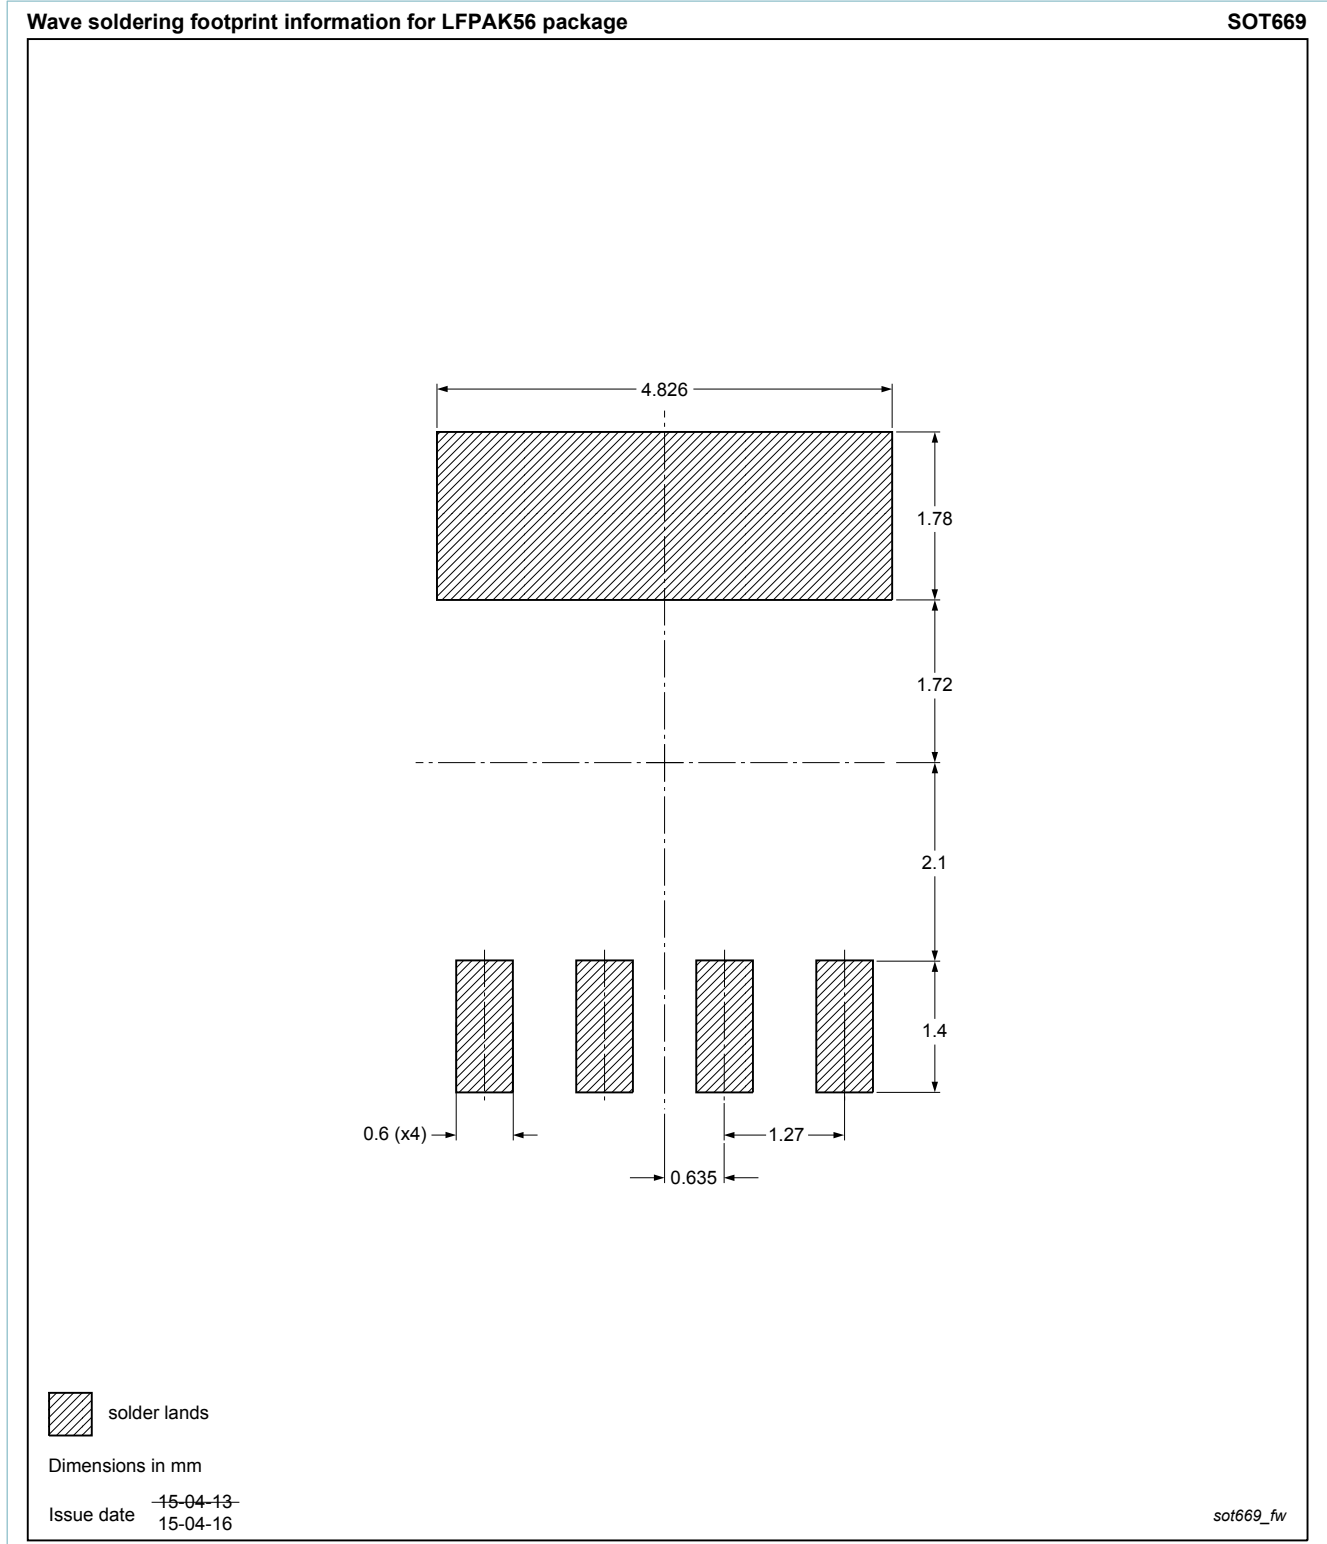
Wave soldering footprint for LFPAK56; Power-SO8 (SOT669)
